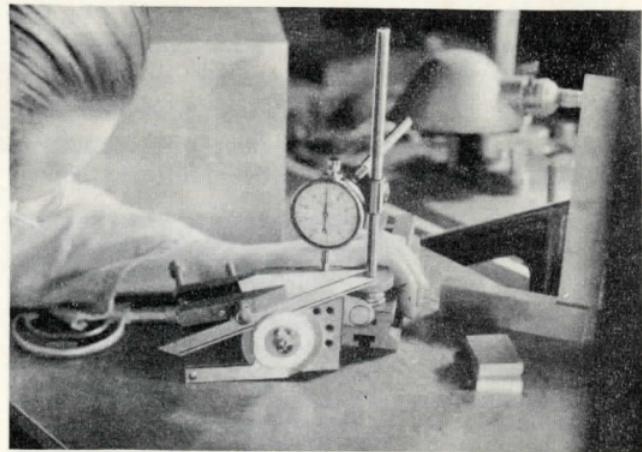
The ease with which it can be set up for use on a wide variety of work makes this Dial Test Indicator combination particularly valuable to inspectors and toolmakers. As shown here, it is being used to check the accuracy of a small angle parallel. The Steel Square, Bevel Protractor, Toolmakers' Clamp and Micrometer are typical tool room equipment.
